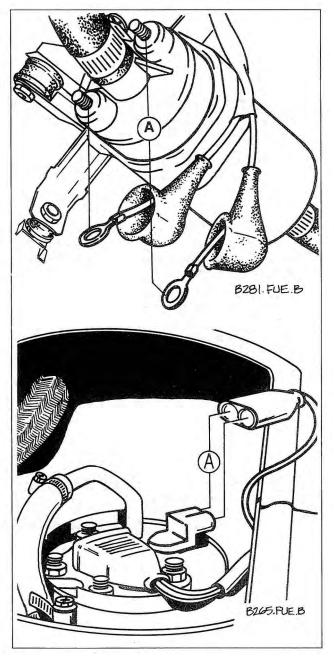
Schematic view of ammeter connected between fuel pump connector and fuel pump on externally mounted fuel pump (top) and in-tank mounted fuel pump (bottom).
